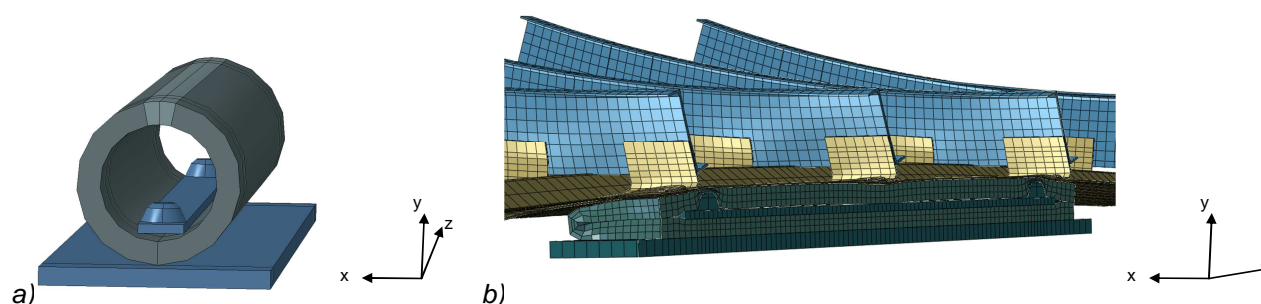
Rubber bumper assembly: a) geometry; b) cut view of the meshed deformed state [Haase 2013]
